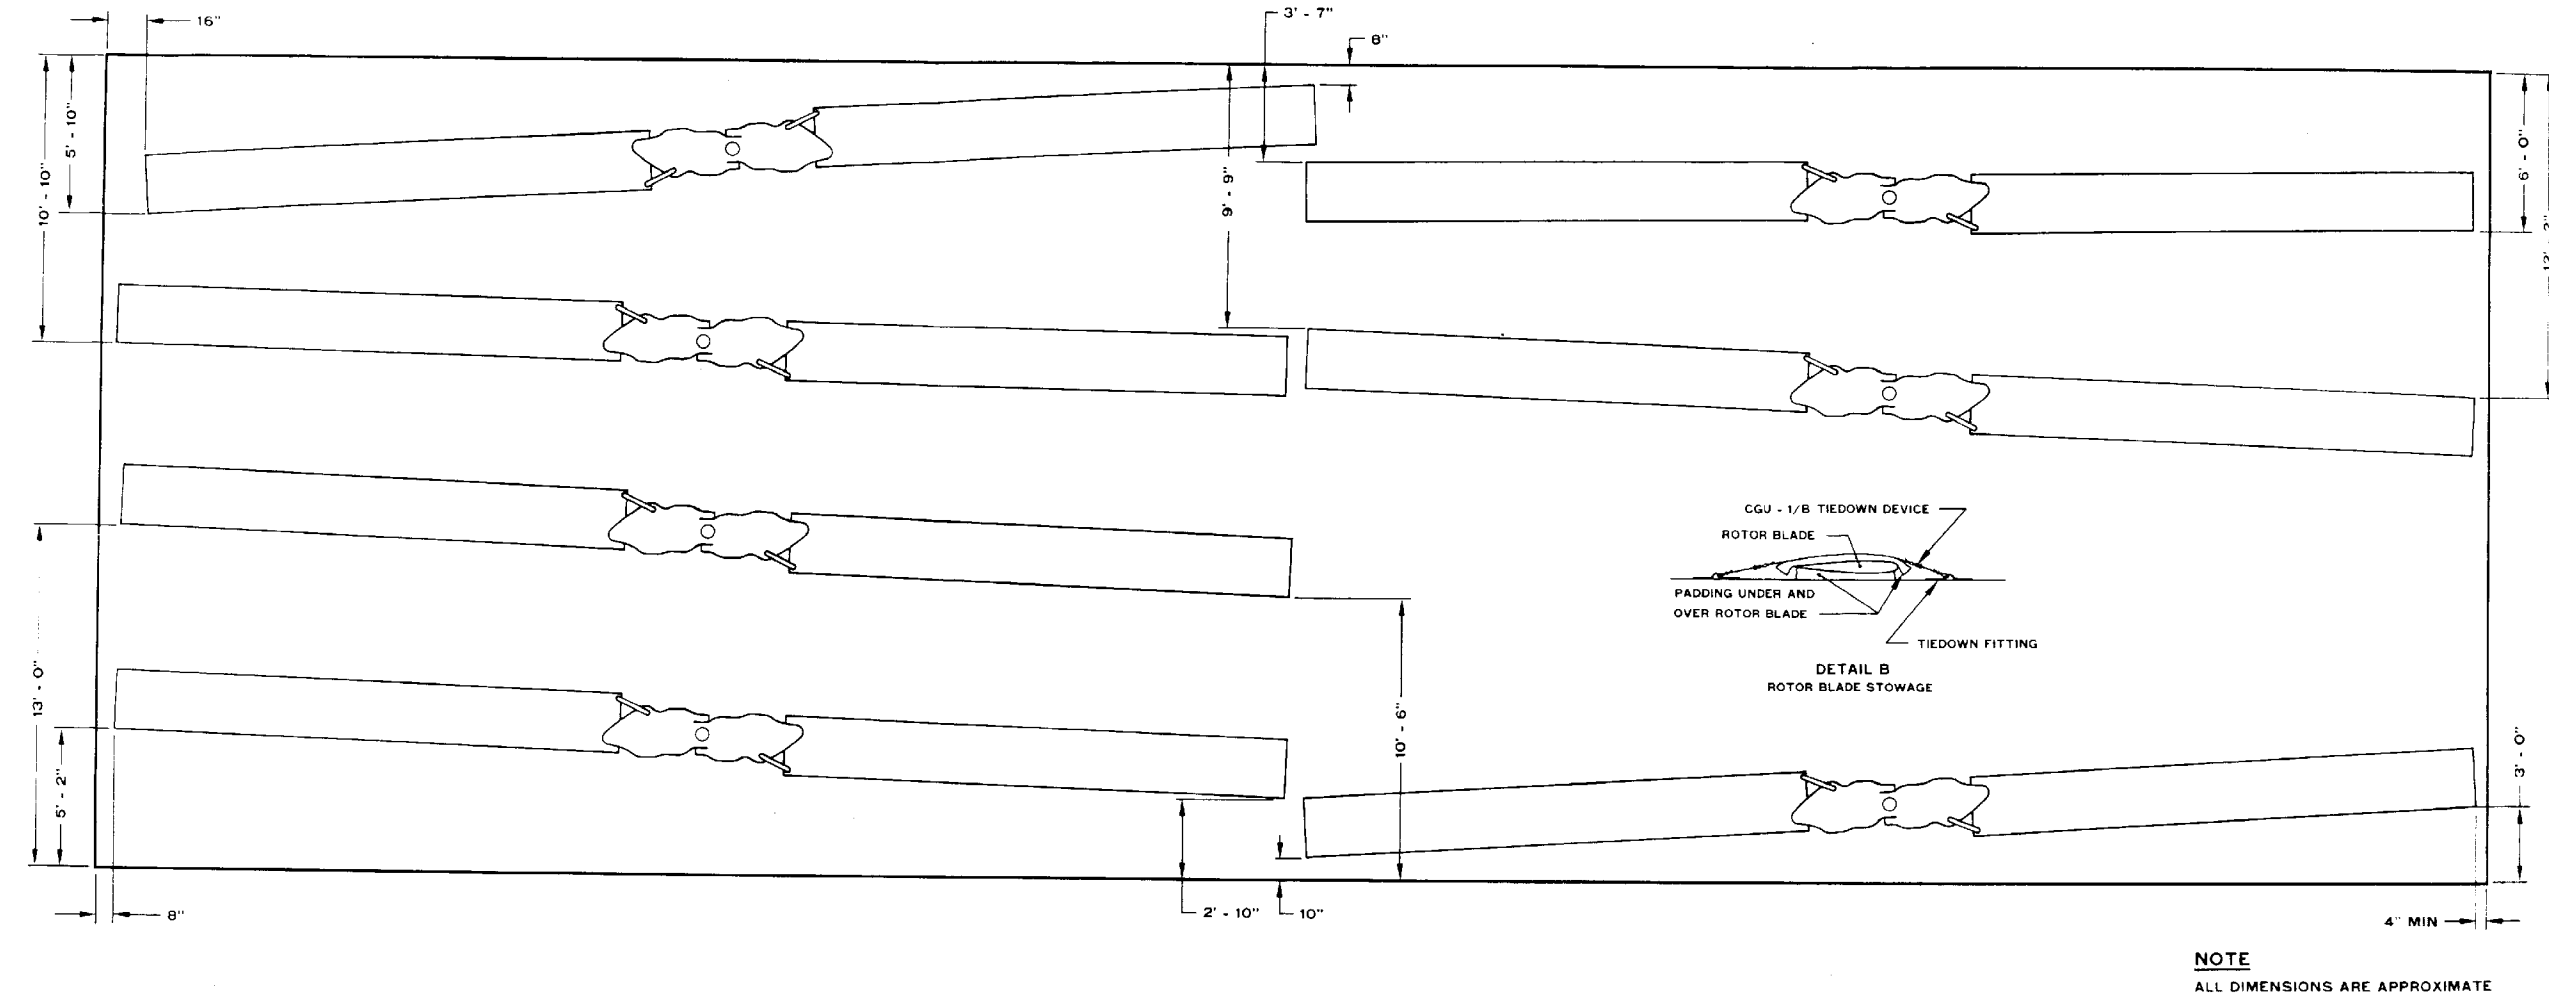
Loading of AH-1 helicopter rotor blade assemblies in SEABEE barge.
